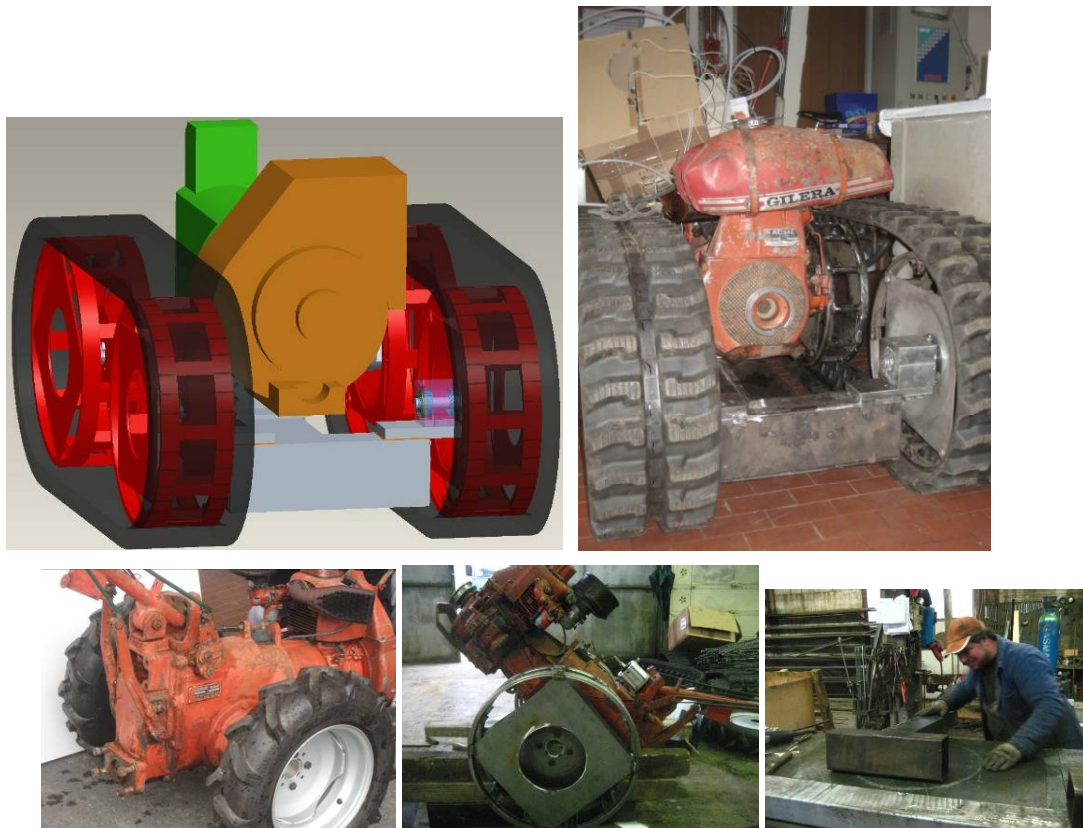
a. Tractor unit final 3DCAD model and first prototype. Assembly.
